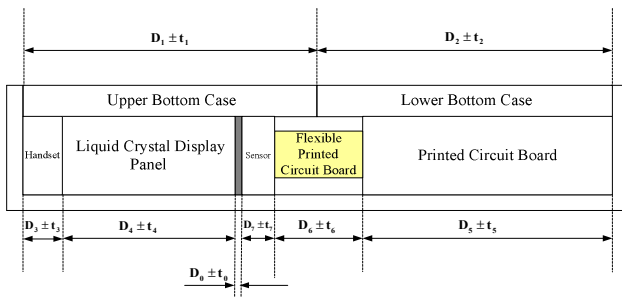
The components of the example product P and the designed blueprint dimensions and tolerances (unit: mm).
